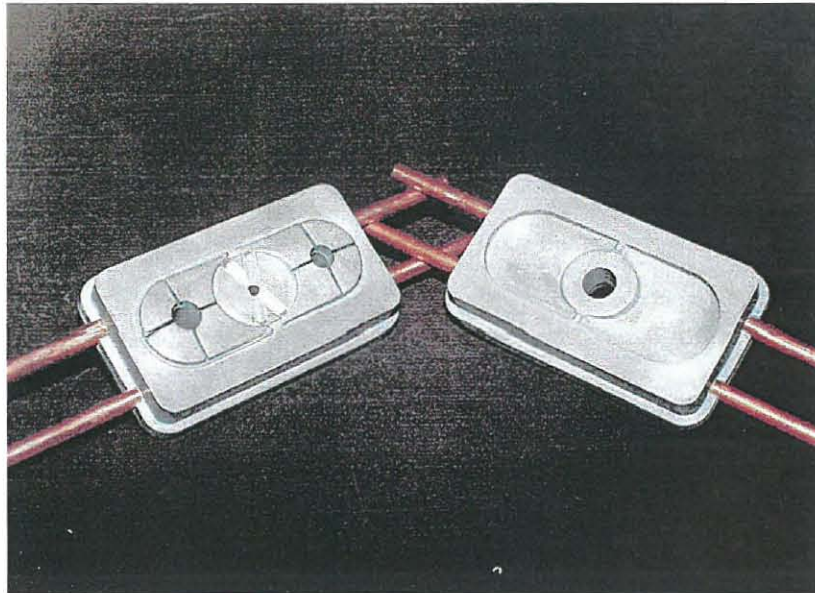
Un-Plated Aluminium Epoxy Inserts.
